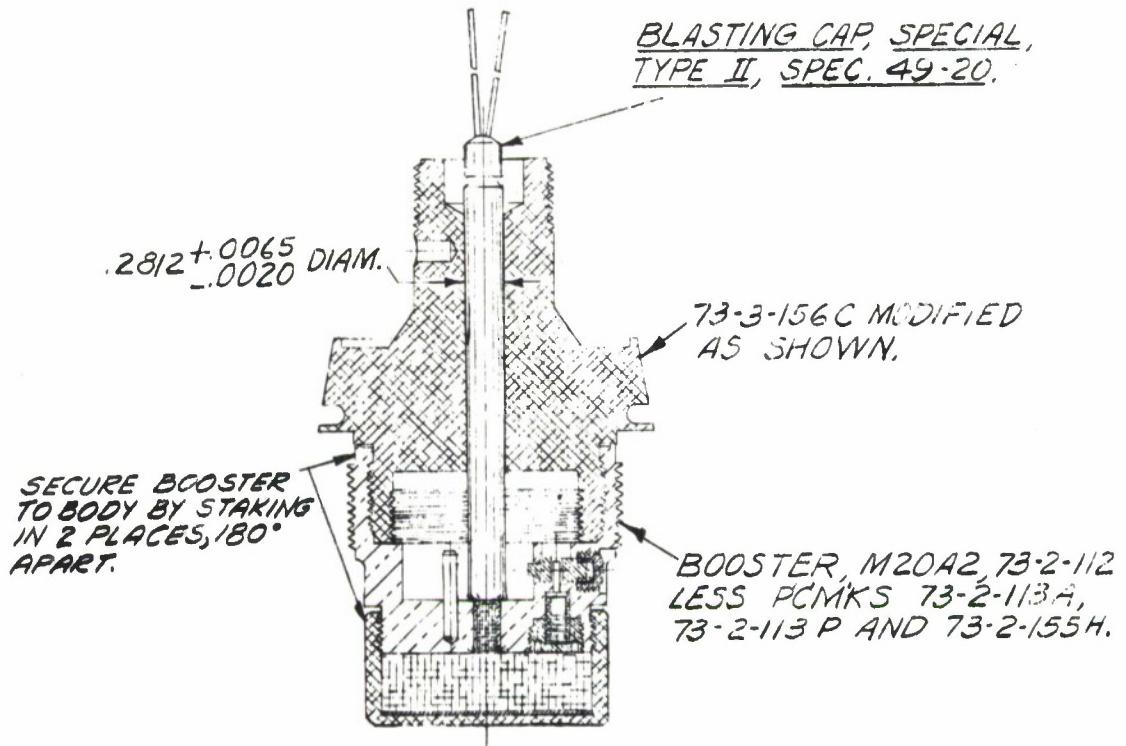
Loading Assembly for 4.2-Inch M329 HE Shell
